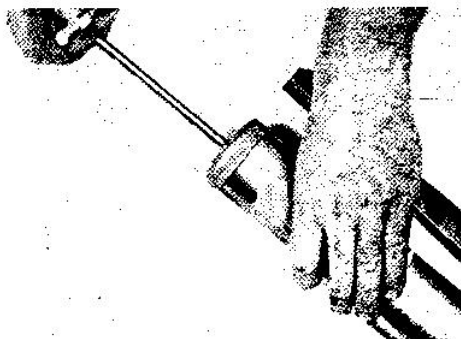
Pushing Follower Rod into place in the cylinder of the 6594 Gun.
